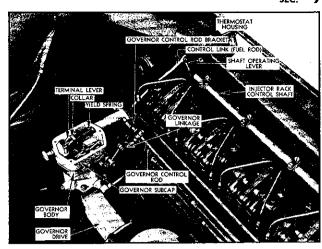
Hydraulic Governor Control Link and Terminal Lever Positions.
